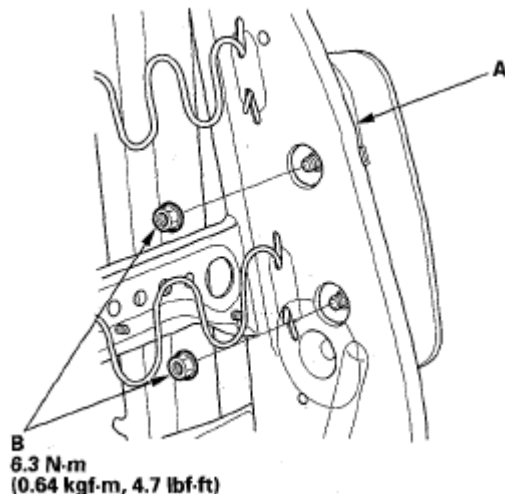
Identifying Seat-Back Frame And Side Airbag Mounting Nuts
